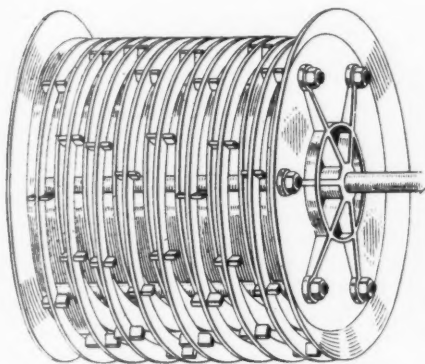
Perspective view of Burch ring grizzly. Fig. 2. Details of construction. Fig. 3. Side elevation
